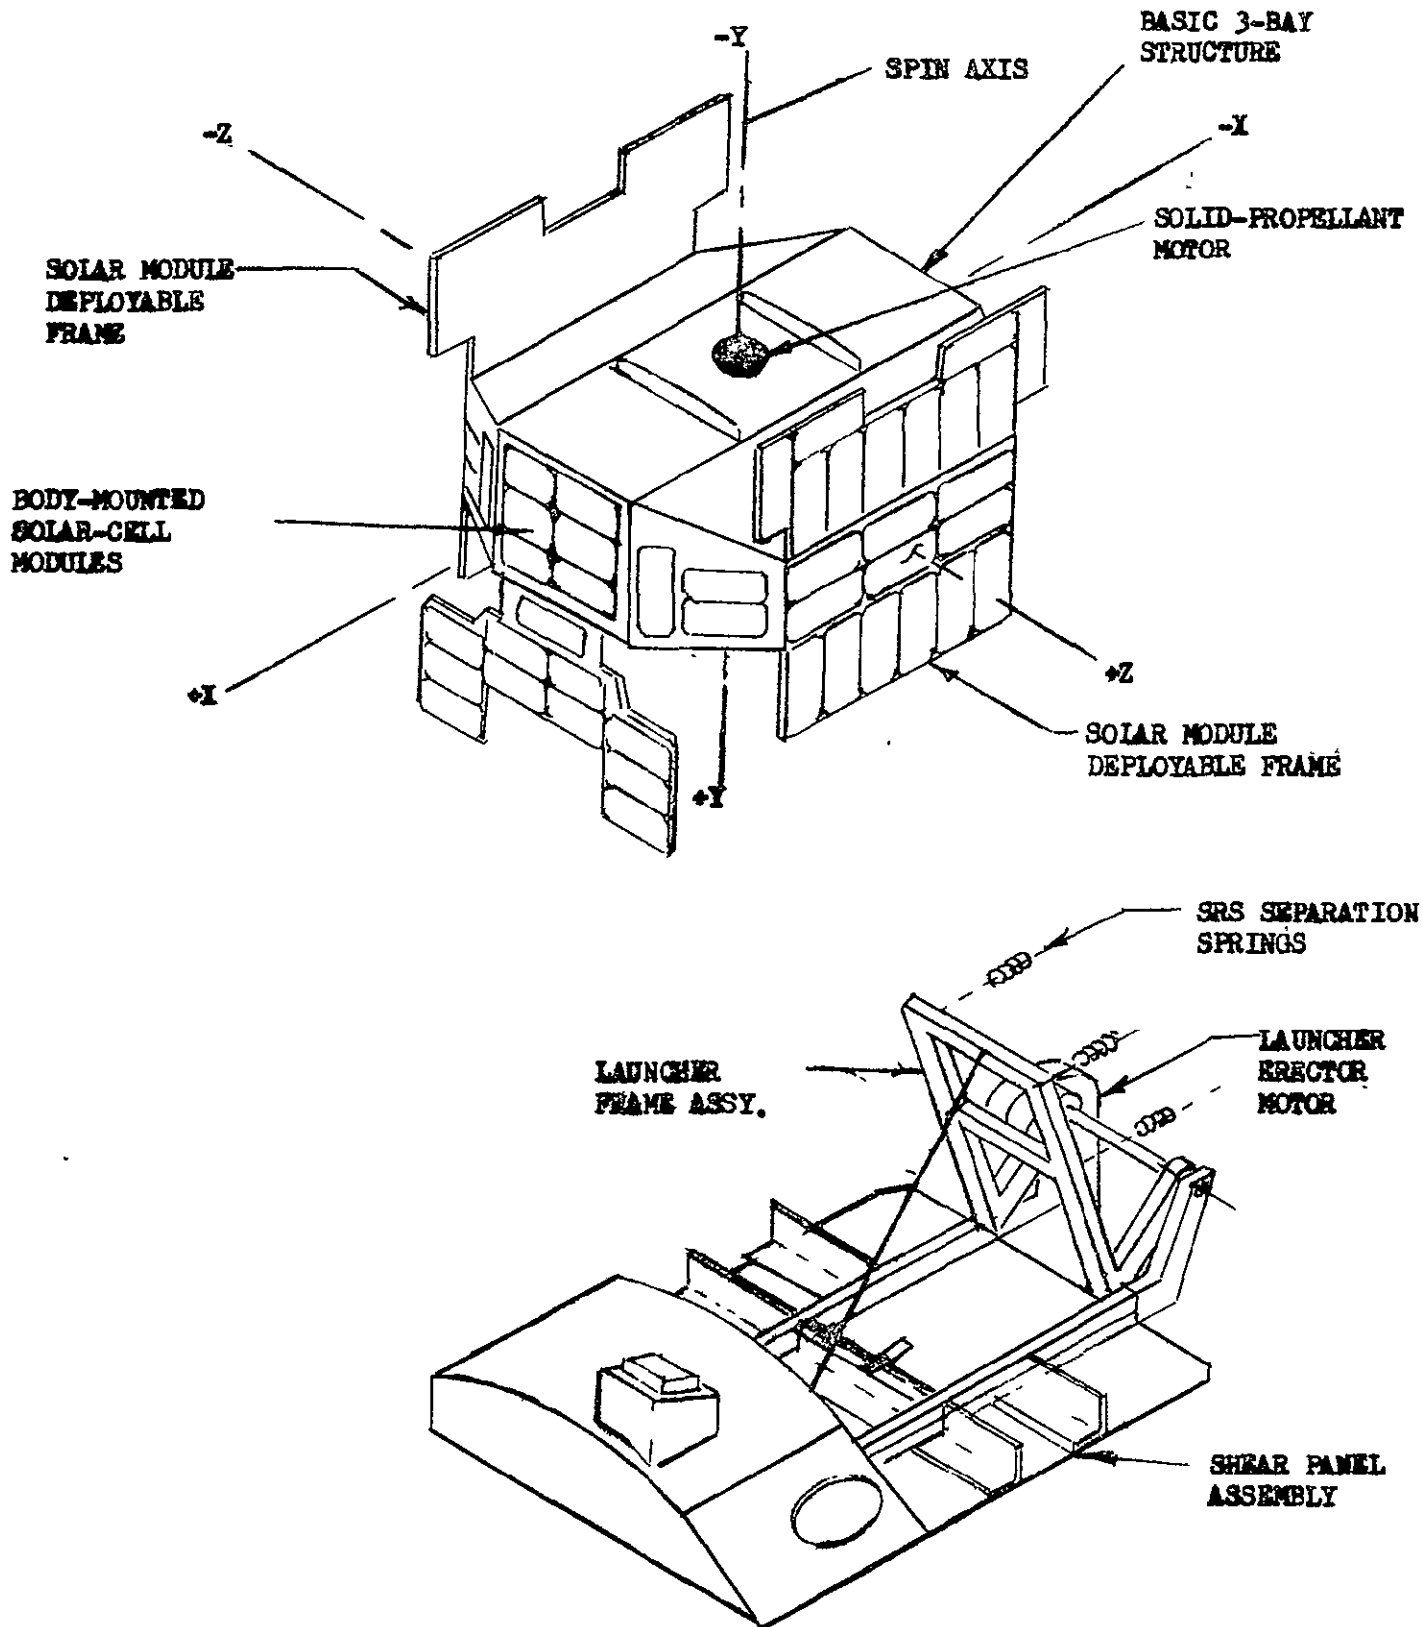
Initial Baseline SRS (P-11) and Launched Assembly)
